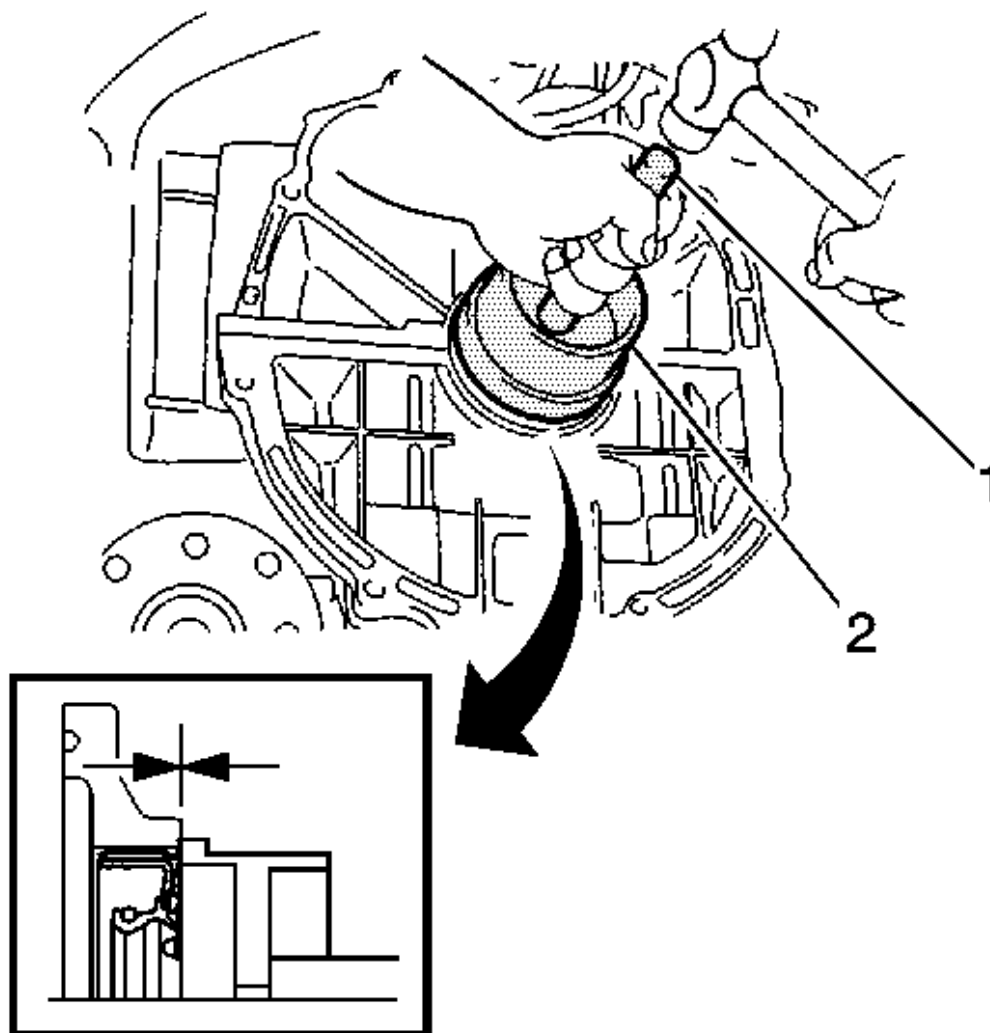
Tapping In Rear Crankshaft Oil Seal
